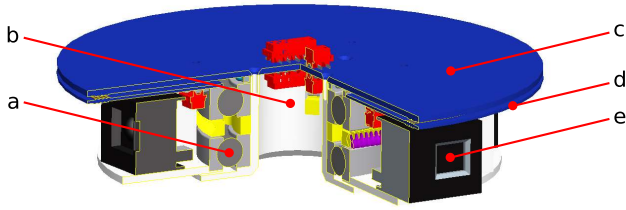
CAD drawing of the scanner, cut in a 3/4 view. a: plastic ball bearing, b: hole in the center to pass cables to other modules, c: fixed PCB (primary coil), d: rotating PCB (secondary coil), e: distance sensor
